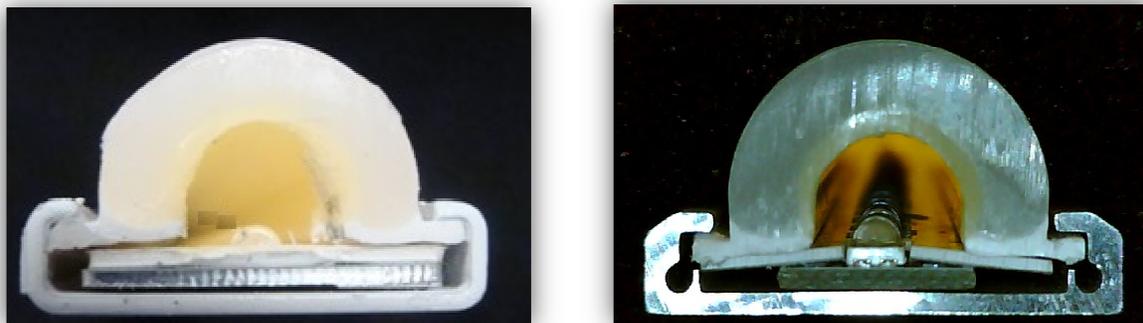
Remote phosphor extrusion in bent aluminum slider assembly (left) and extruded aluminum slider assembly (right); note PCB width is 18mm in left assembly and 10mm wide in right assembly
